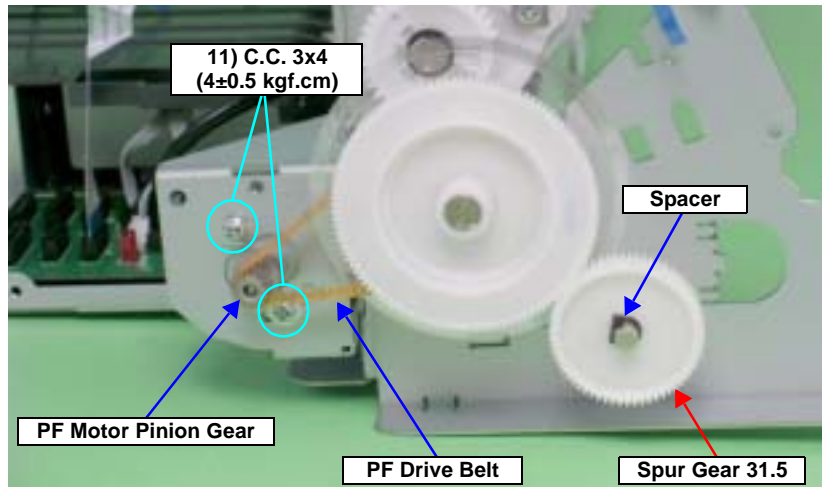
Removing the PF Drive Belt and Spur Gear 31.5
